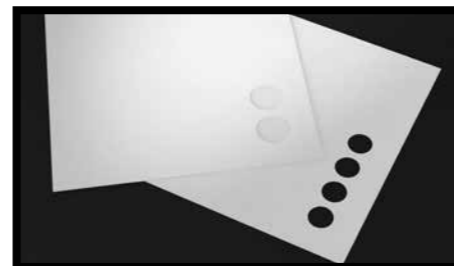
All versions of ZERO.3 can be cut with CNC machines. Cutter rotation speed ranges from 12000 to 18000 RPM. The cutter must be pushed forward at a speed ranging from 0,5 to 1 m/min.
